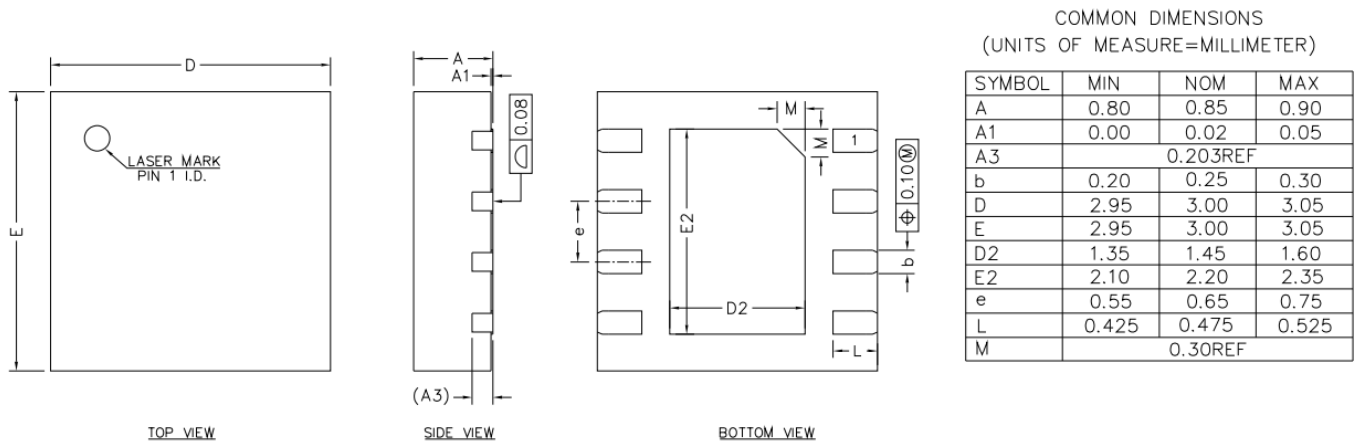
DFN8 Package Shape and Dimension in millimeters (inches)
